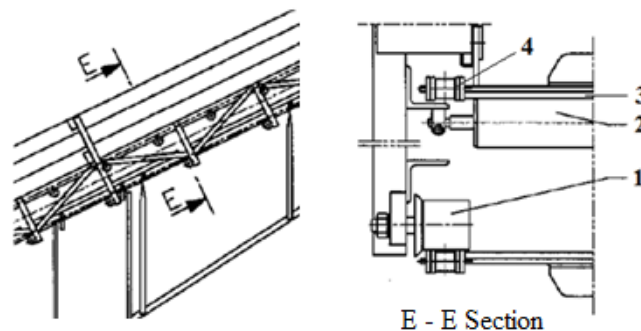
View of the support roller on the sloping conveyor. (1. Support roller, 2. Belt roller, 3. Conveyor belt, 4. Chain)
